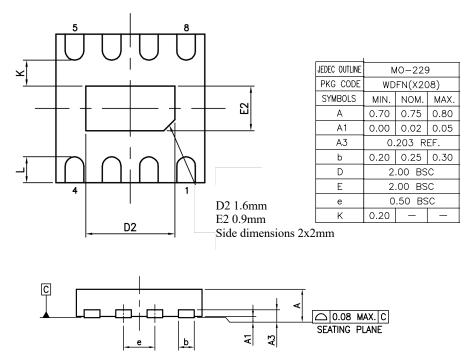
Suggested PCB layout for the integration of the linPOL48V DFN8 package.
